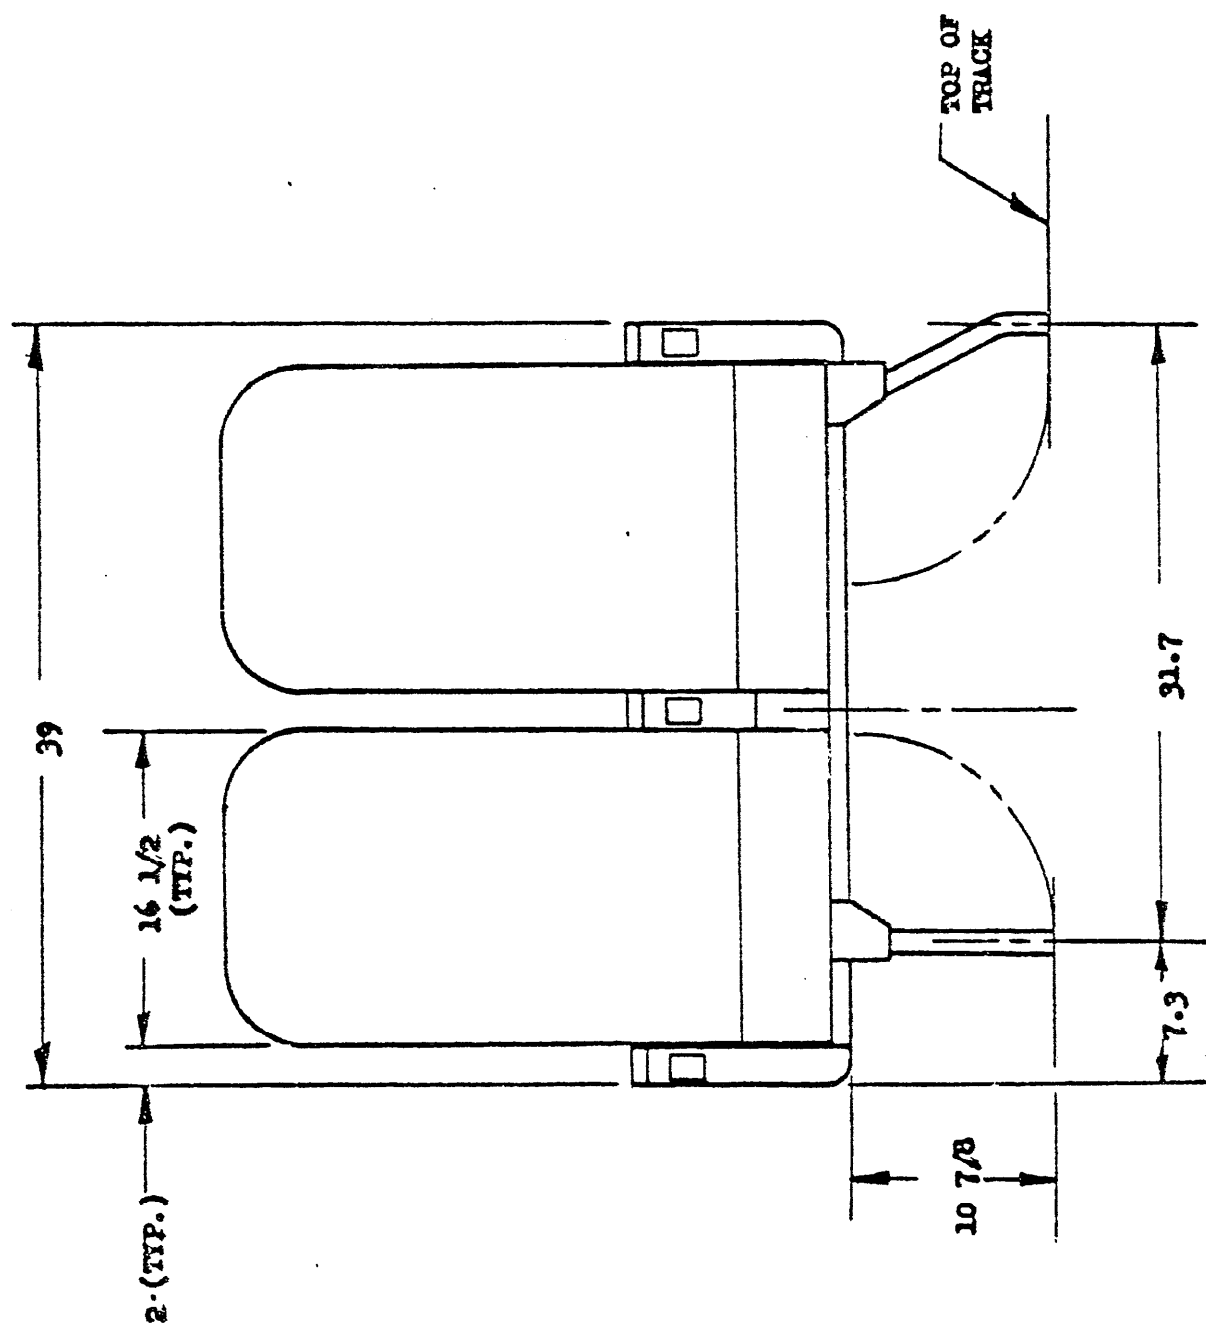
DIMENSIONS OF TYPE I SEAT
